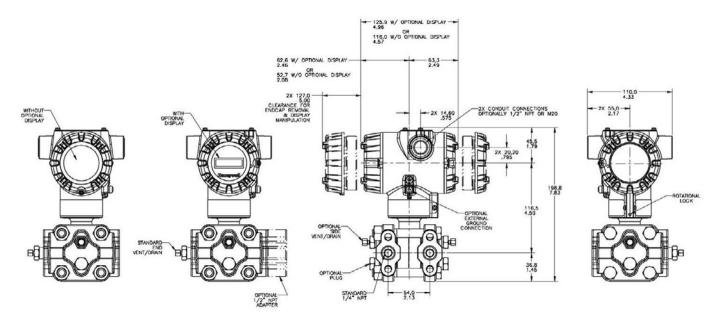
Typical mounting dimensions of STD810, STD820, STD830 & STD870 for reference
